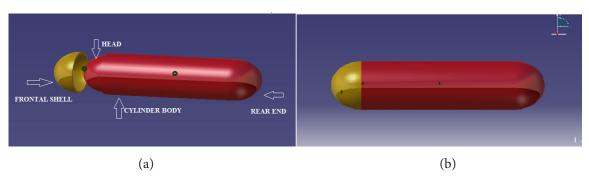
Axisymmetric body with frontal shell (a) Exploded view (b) Assembled view.
